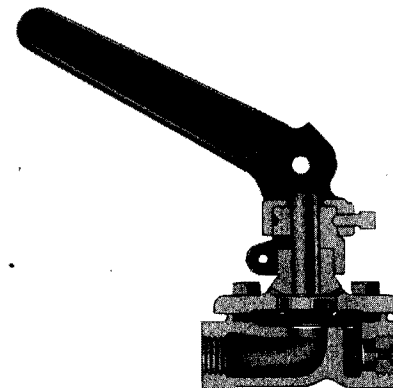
Sectional View of the Quick Opening Diaphragm Cock with Lever Type Handle
